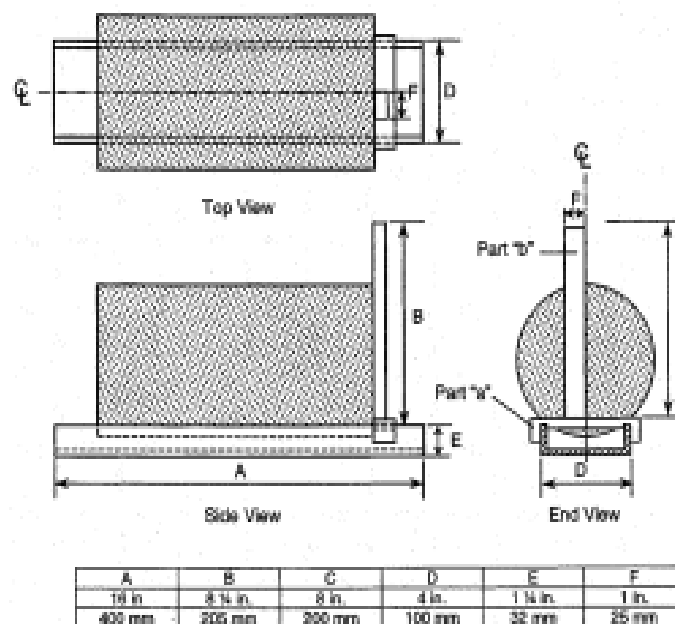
General Views of a Suitable Apparatus for Marking End Diameters Used for Alignment of Specimen in Testing Machine
